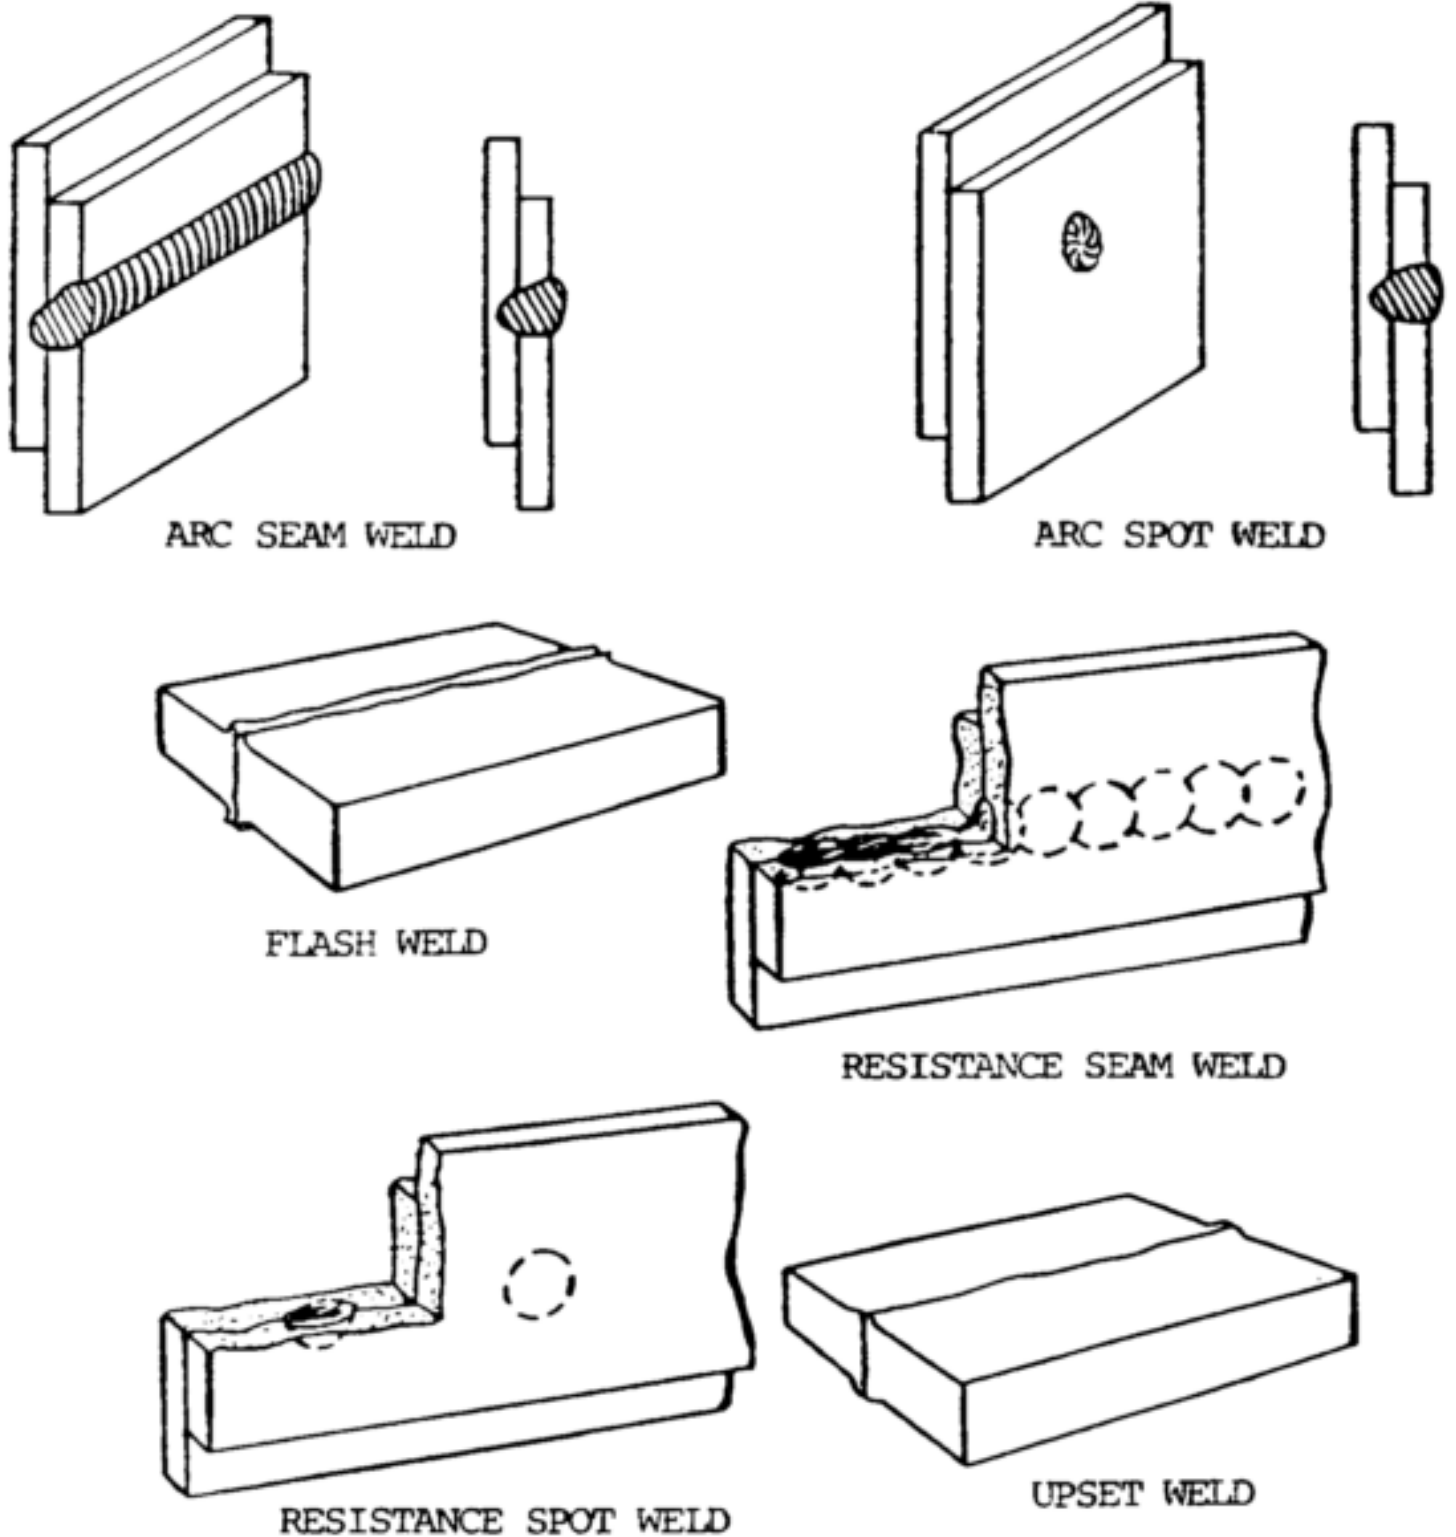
Flash, seam, spot, and upset welds.
